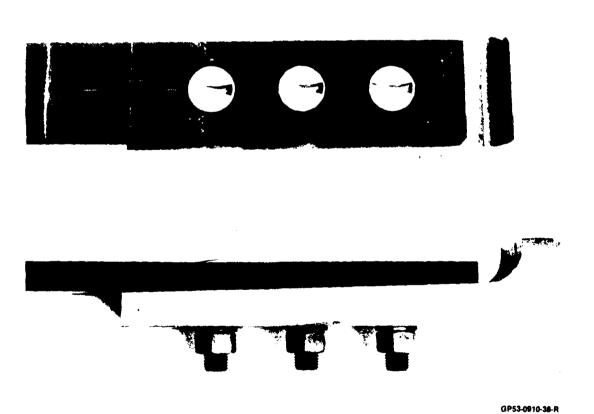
Failed Multifastener Joint Static Tension Test Specimen
